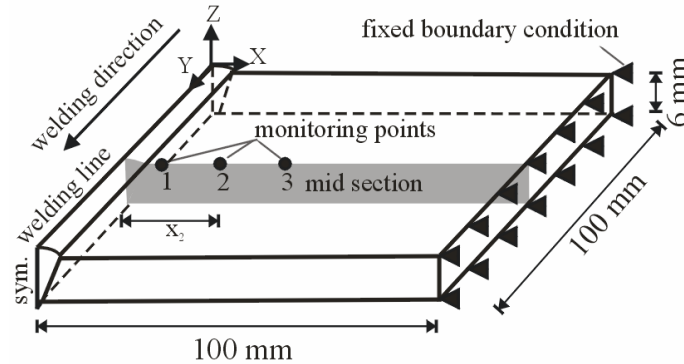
Geometry of a Steel-Plate with a Single Butt Weld
